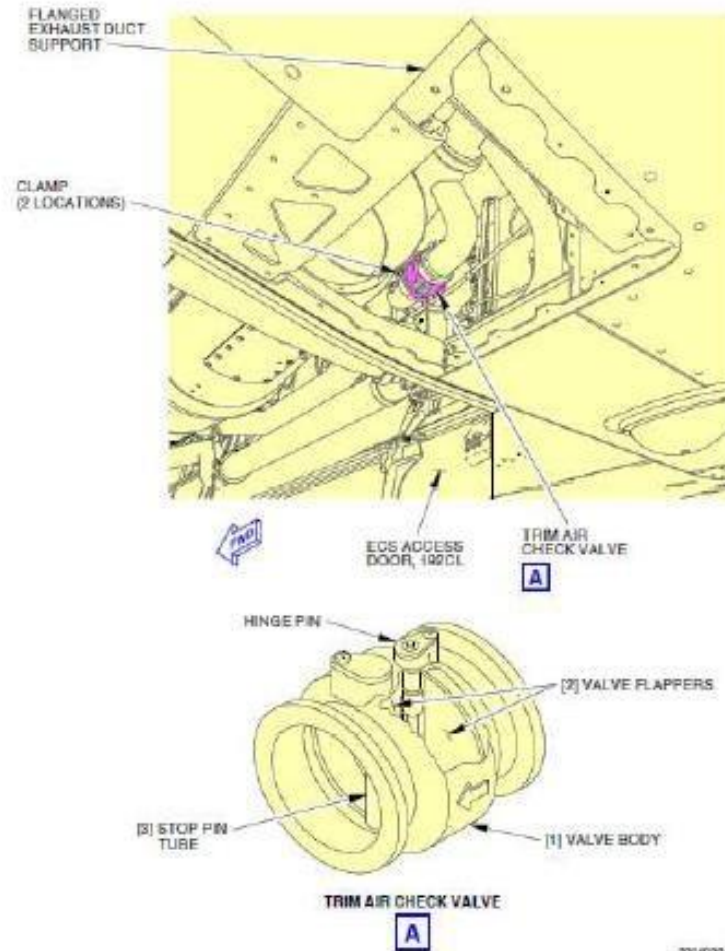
INSPECTION: TRIM AIR CHECK VALVES
